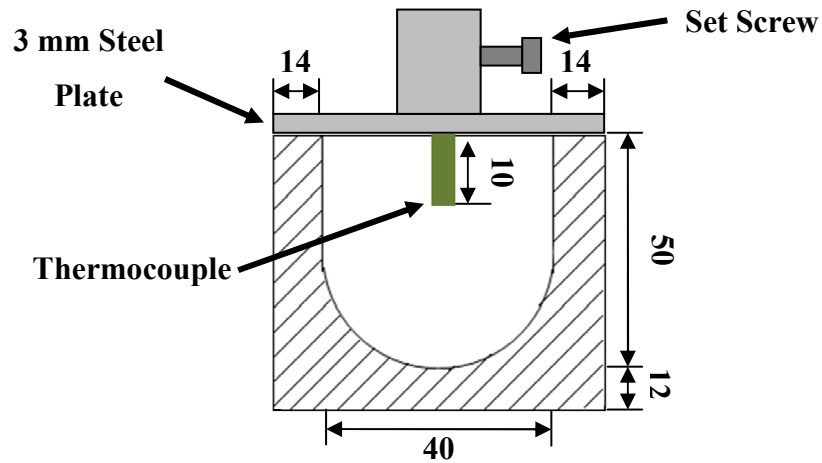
Final Assembly for Graphite Moulds (Dimensions in mm)
